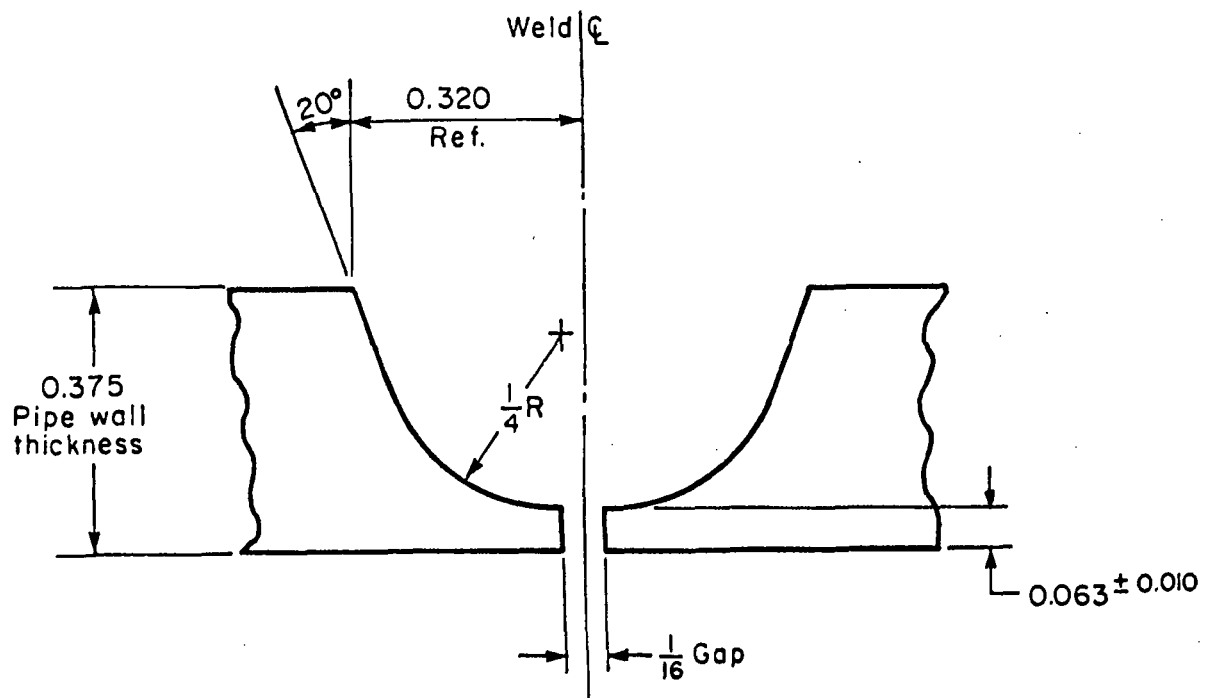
SINGLE U-GROOVE WELD PREPARATION
